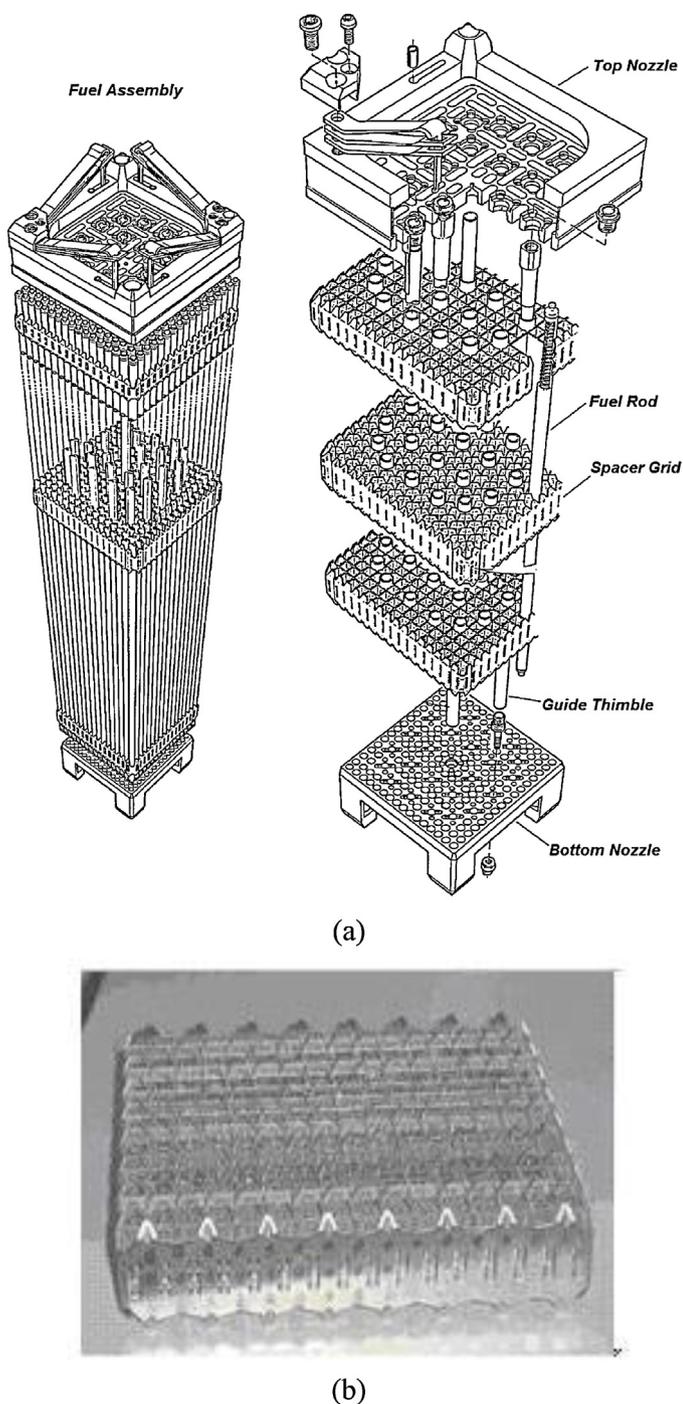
Fuel assembly structure: (a) the fuel assembly and its components and (b) geometry of the spacer grid.
